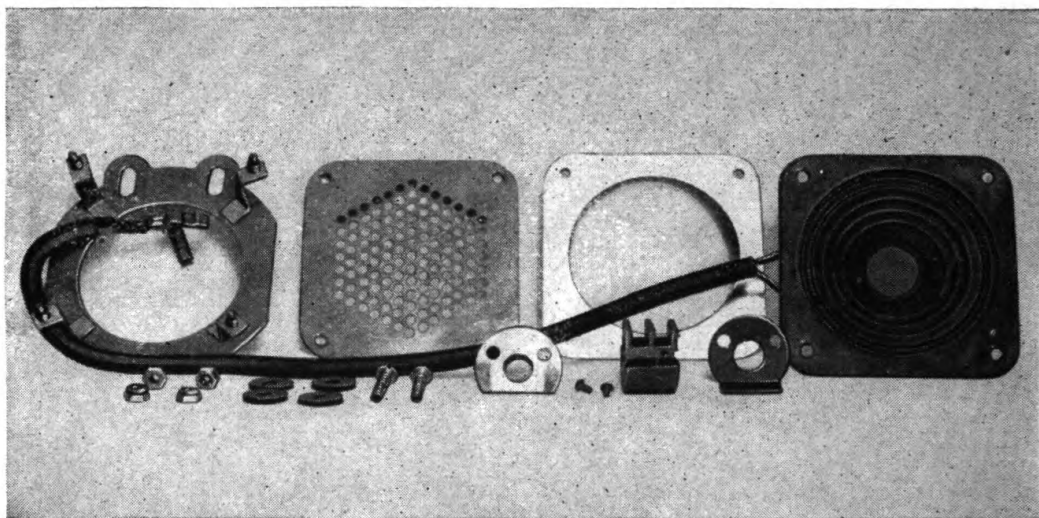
Diver's transmitter-reproducer unit, disassembled.
